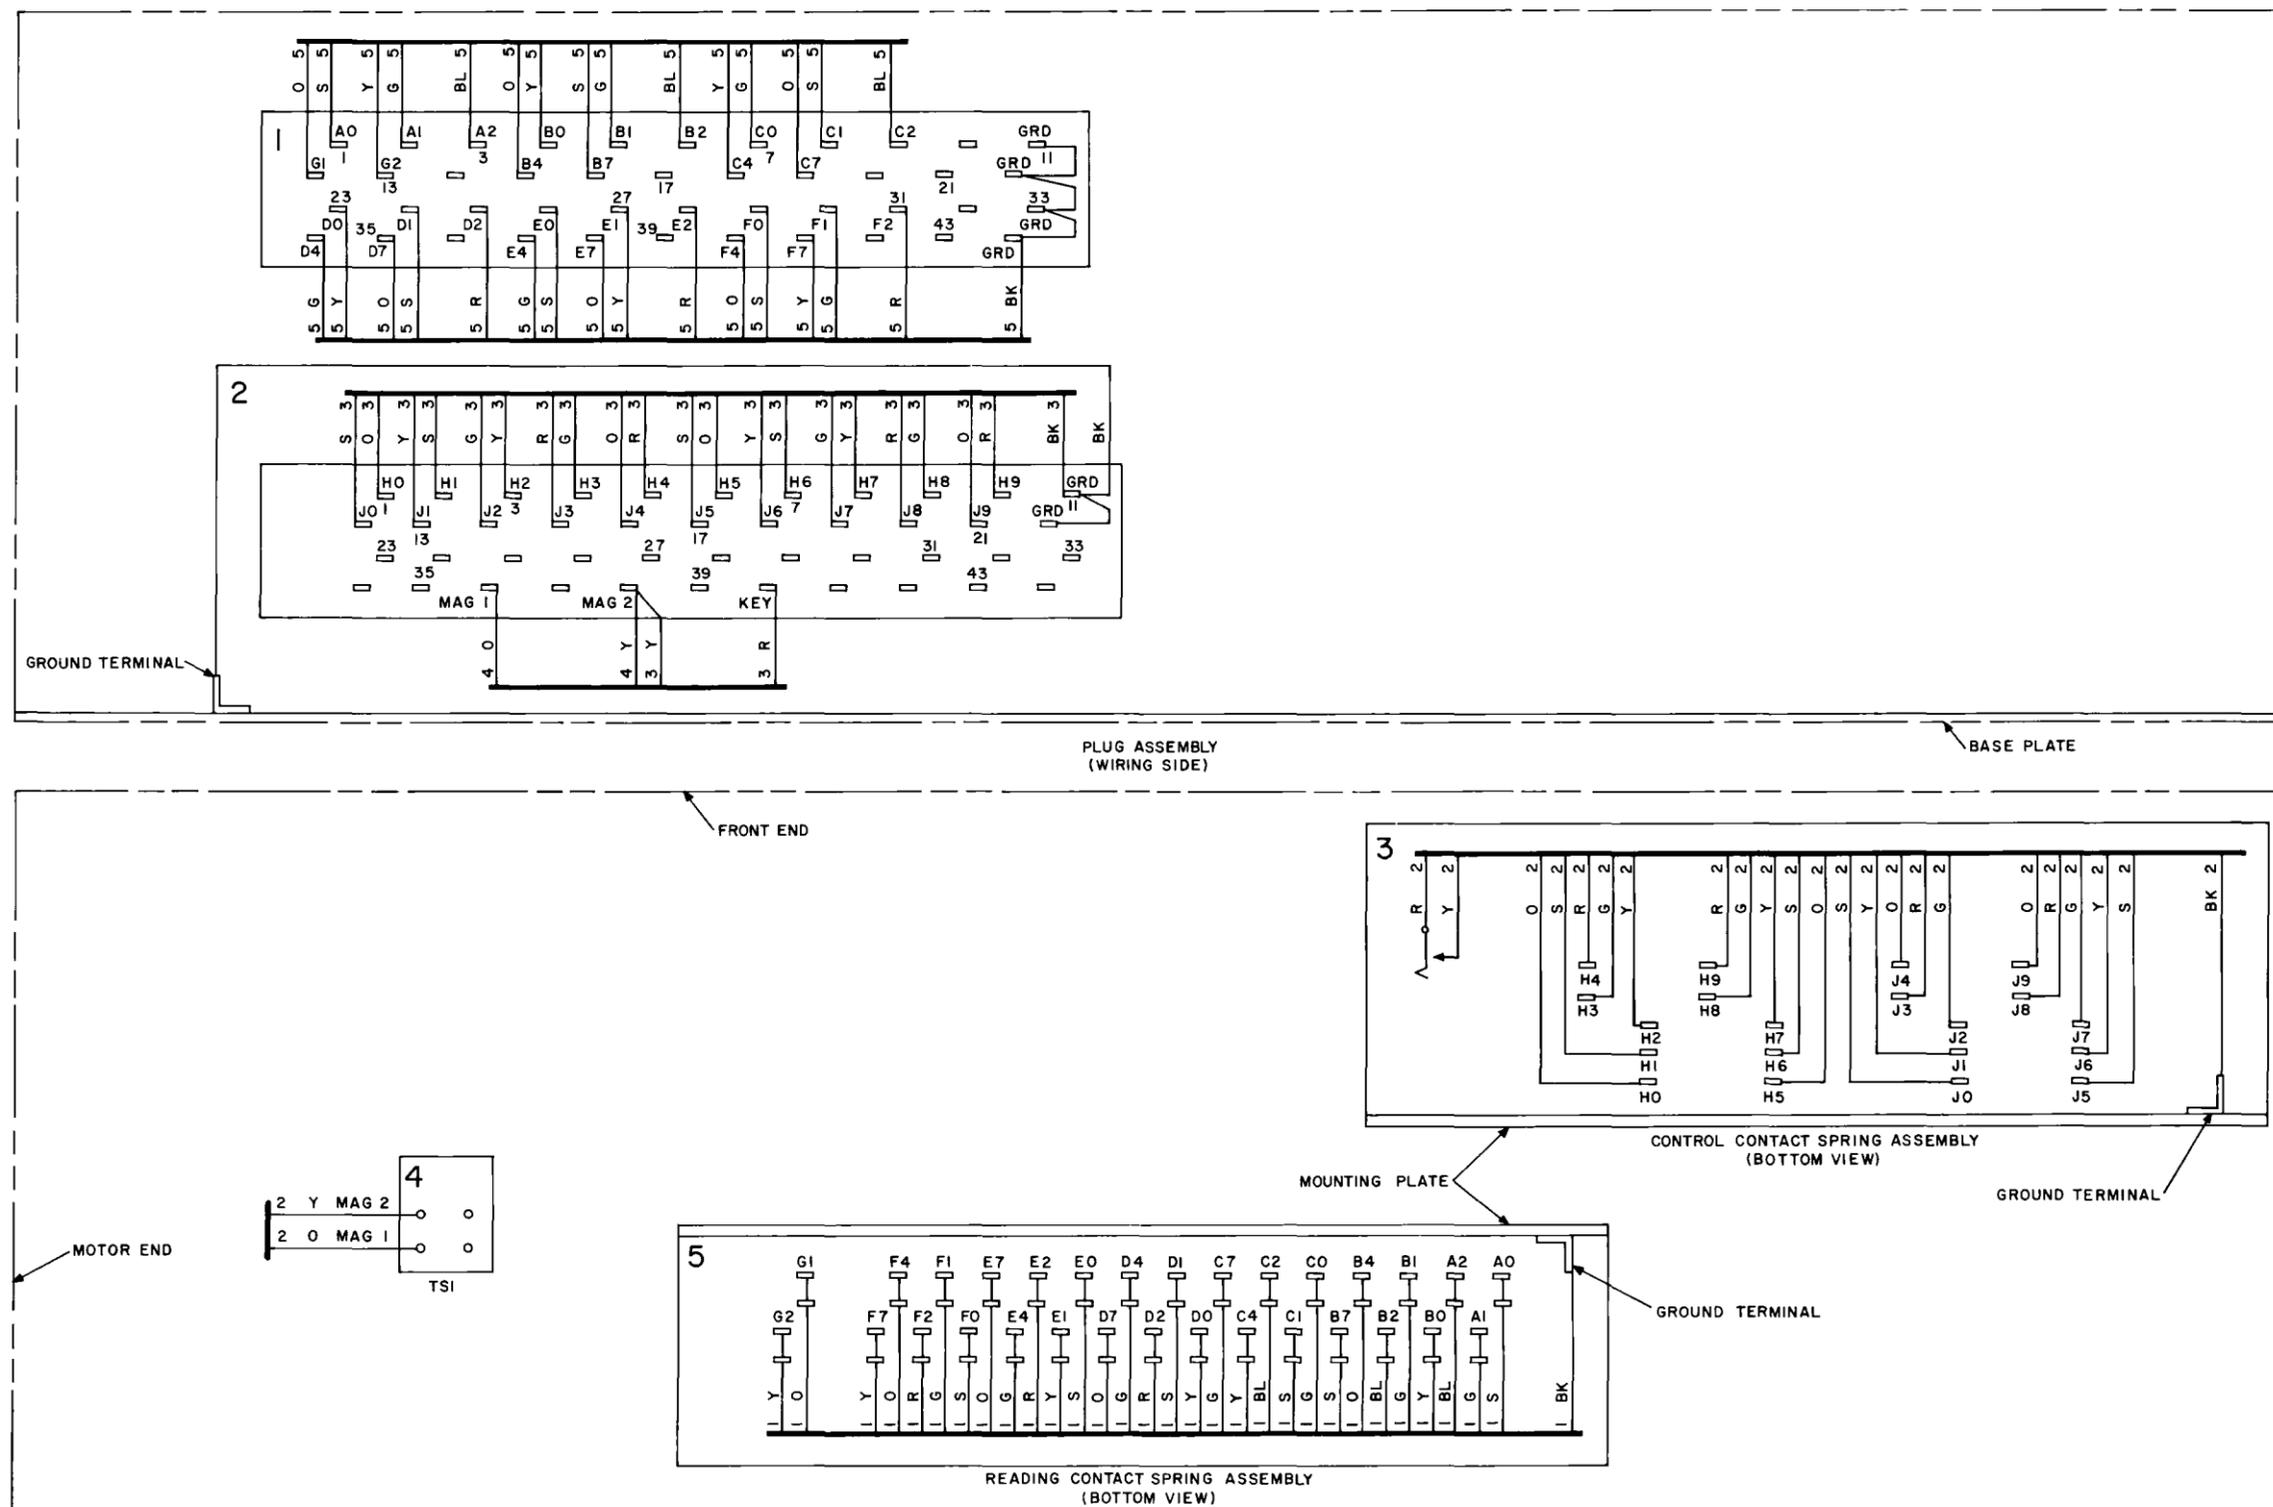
Wiring Diagram—KS-13835 L2 Reader With Bus-Bar Type Stationary Springs in the Control Spring Assemblies
